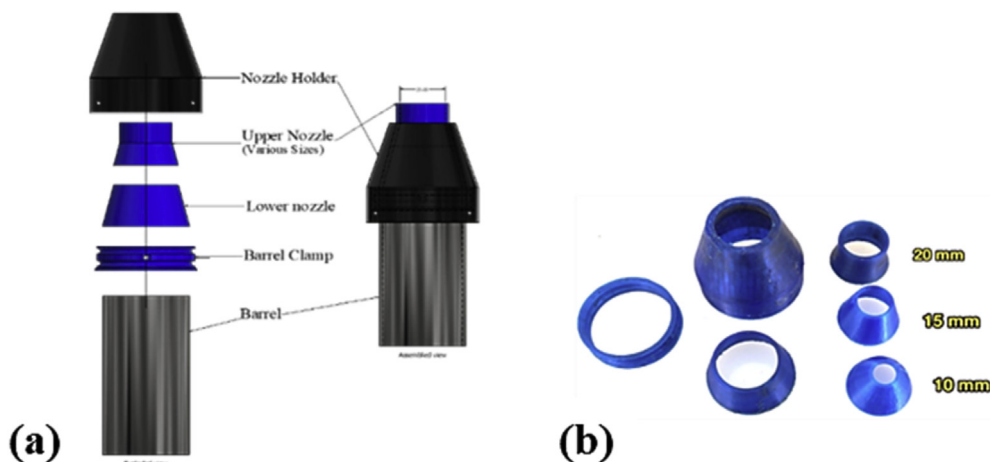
(a) detailed assembly drawing of the proposed nozzle, (b) prototyped nozzles using 3D printing.
